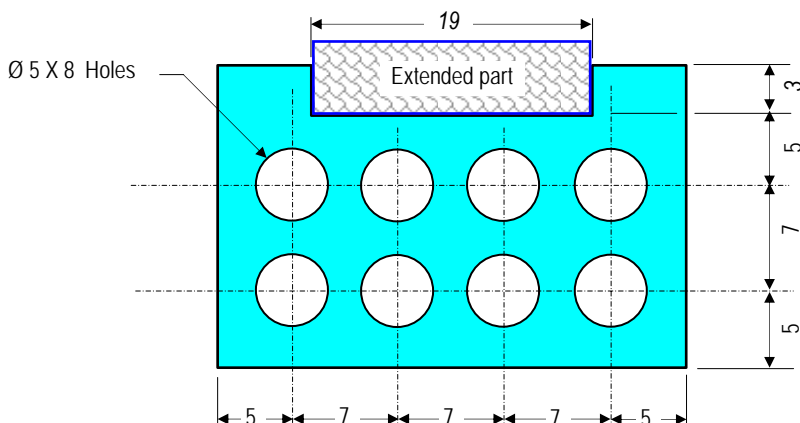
The tool holder support for multiple positioning of the tool holder.
